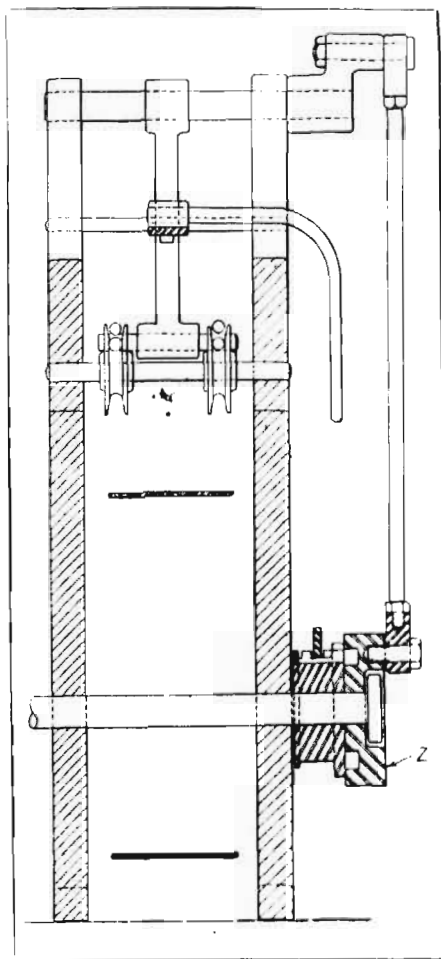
Sectional View of Stacking Mechanism Shown in Fig. 23
